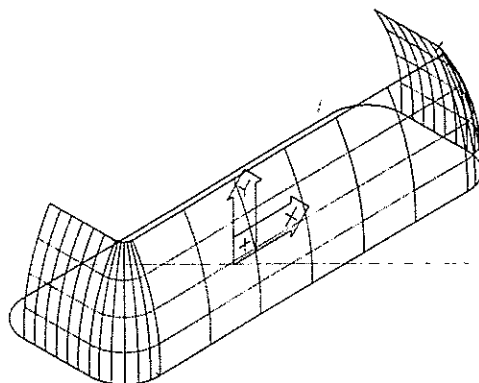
A sweep surface constructed and two sweep surfaces mirrored
